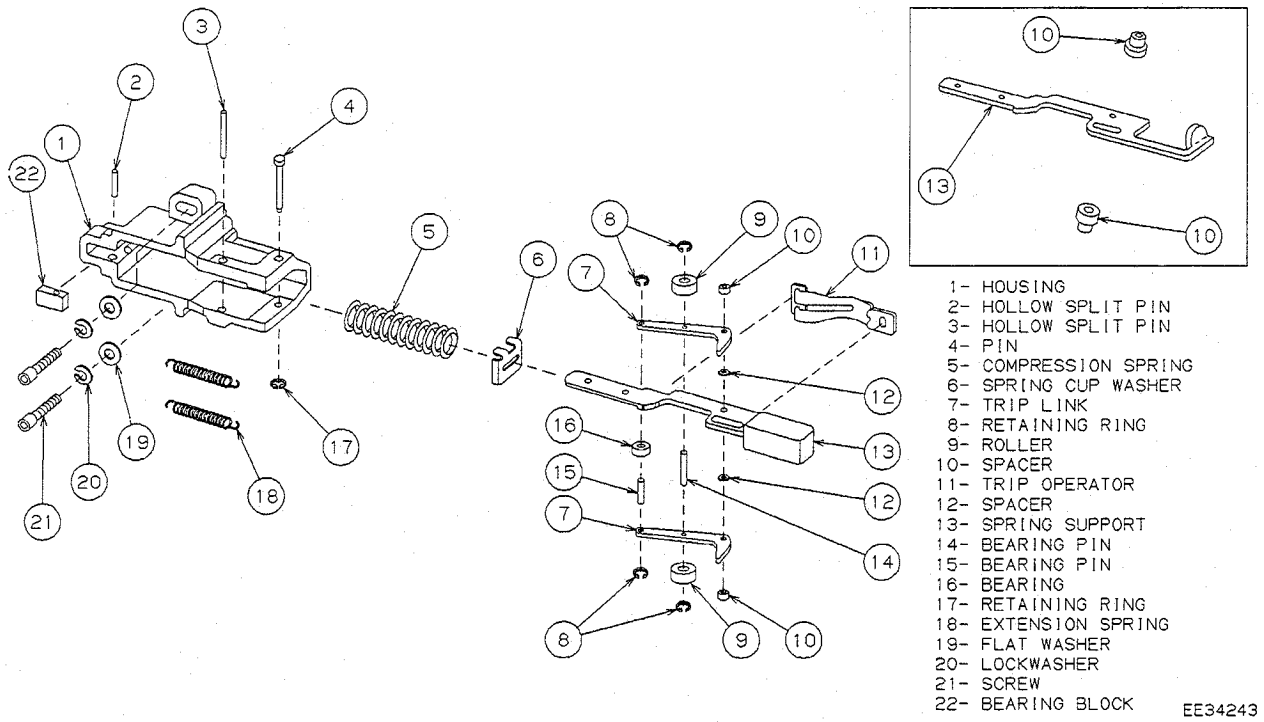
Arc Tip Latch Assembly, Exploded View
